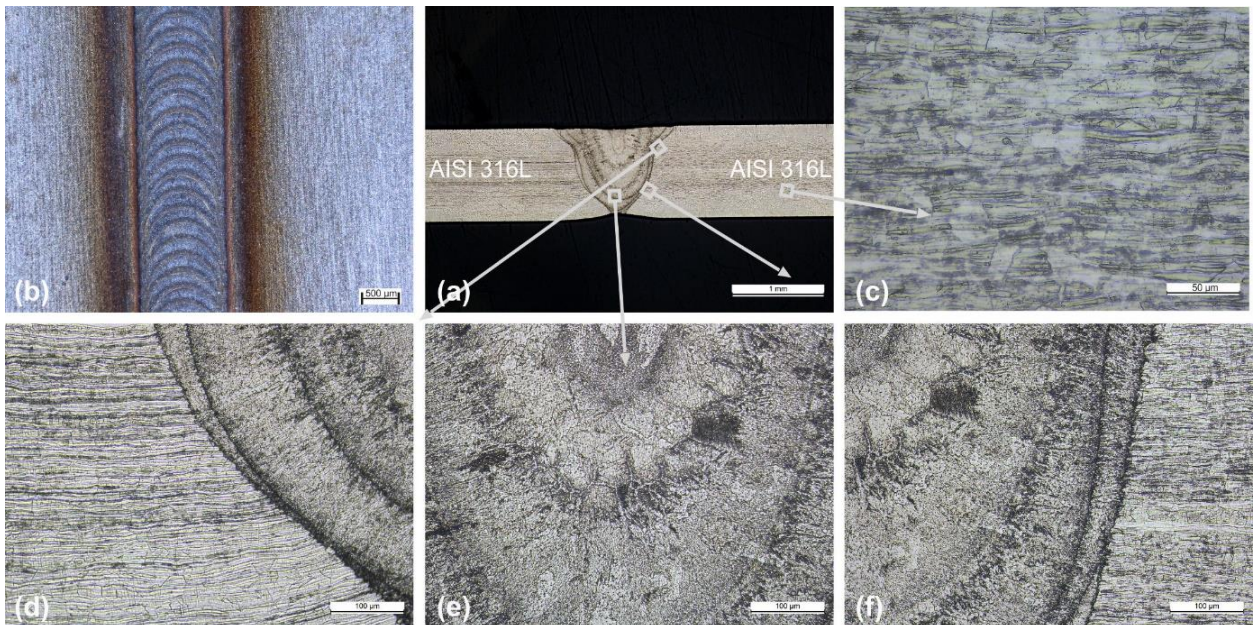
Pulsed laser welding of AISI 316L, a) weld bead profile, b) top view of the weld joint, c) base material, d) and f) detail of the weld bead – base material interface, e) detail of the weld area [STA22].
